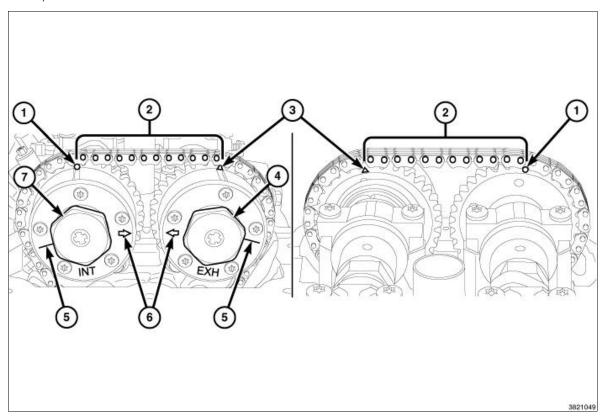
Left Side Cam Phaser Scribe Lines, Arrows & Cylinder Head Cover Mounting Surface
